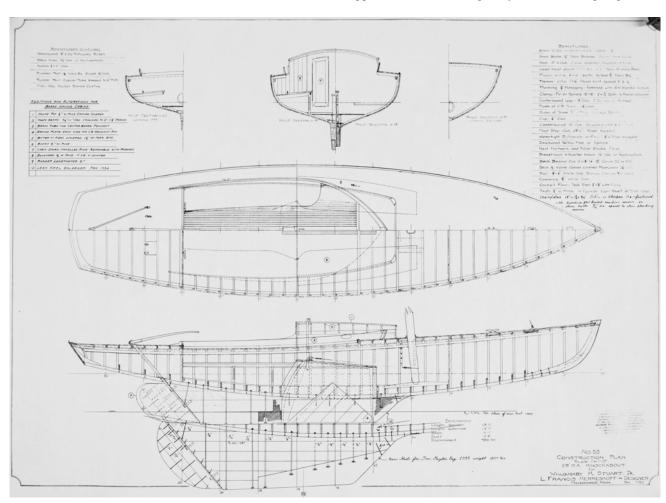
Design No. 53 plans showing the original plans for BEN with the modifications for PALMETTO drawn on top.
